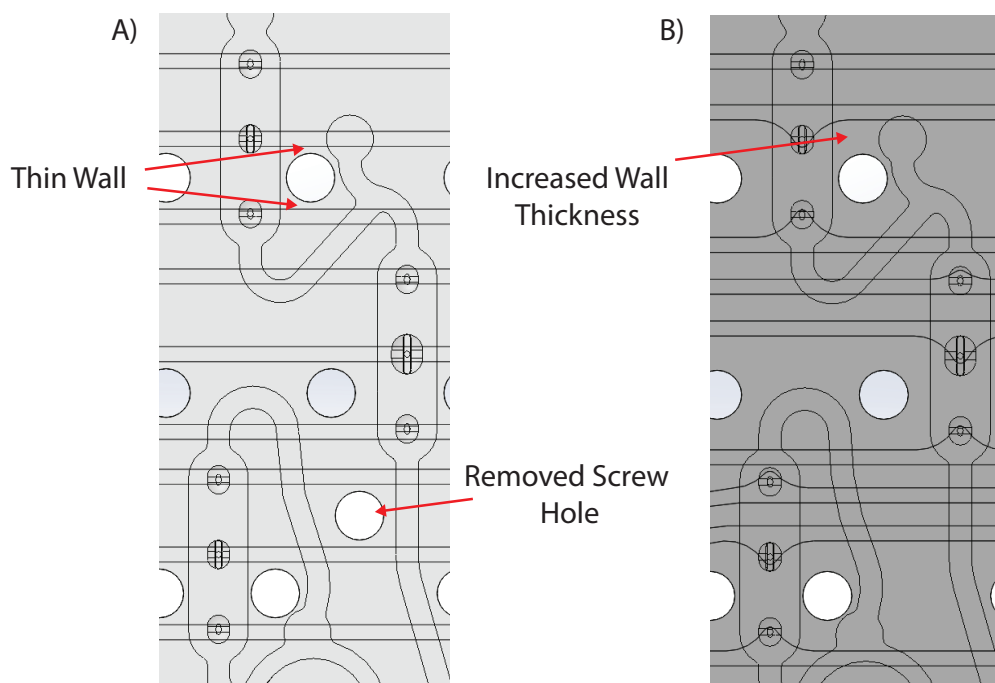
The revision 2 pneumatic manifold leaked between the horizontal pneumatic channels and the screw holes. The thin wall ($470\text{ }\mu\text{m}$ thick, 1mm tall) separating the channels and screw holes fractured during manufacturing. The updated pneumatic platforms remove one set of screws to allow a thicker wall (2 mm wide, 1 mm tall).
